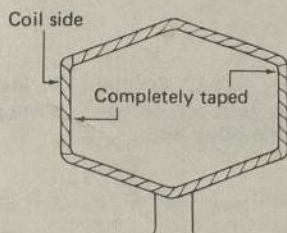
A diamond-shaped coil used on open-slot stators.
